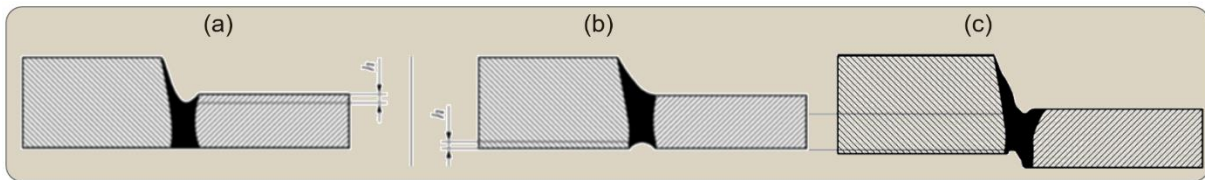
Weld geometry defect (a) Upper weld concavity (b) Lower weld concavity (c) Weld cross section
